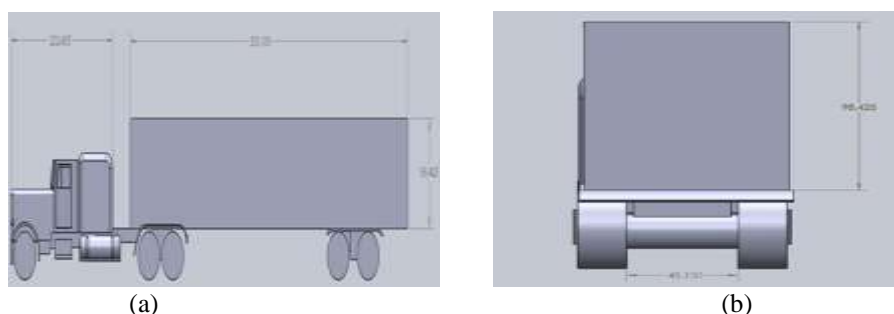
Semi-trailer model major dimensions. (a) Side view (b) Rear view (Dimensions are in inch)
